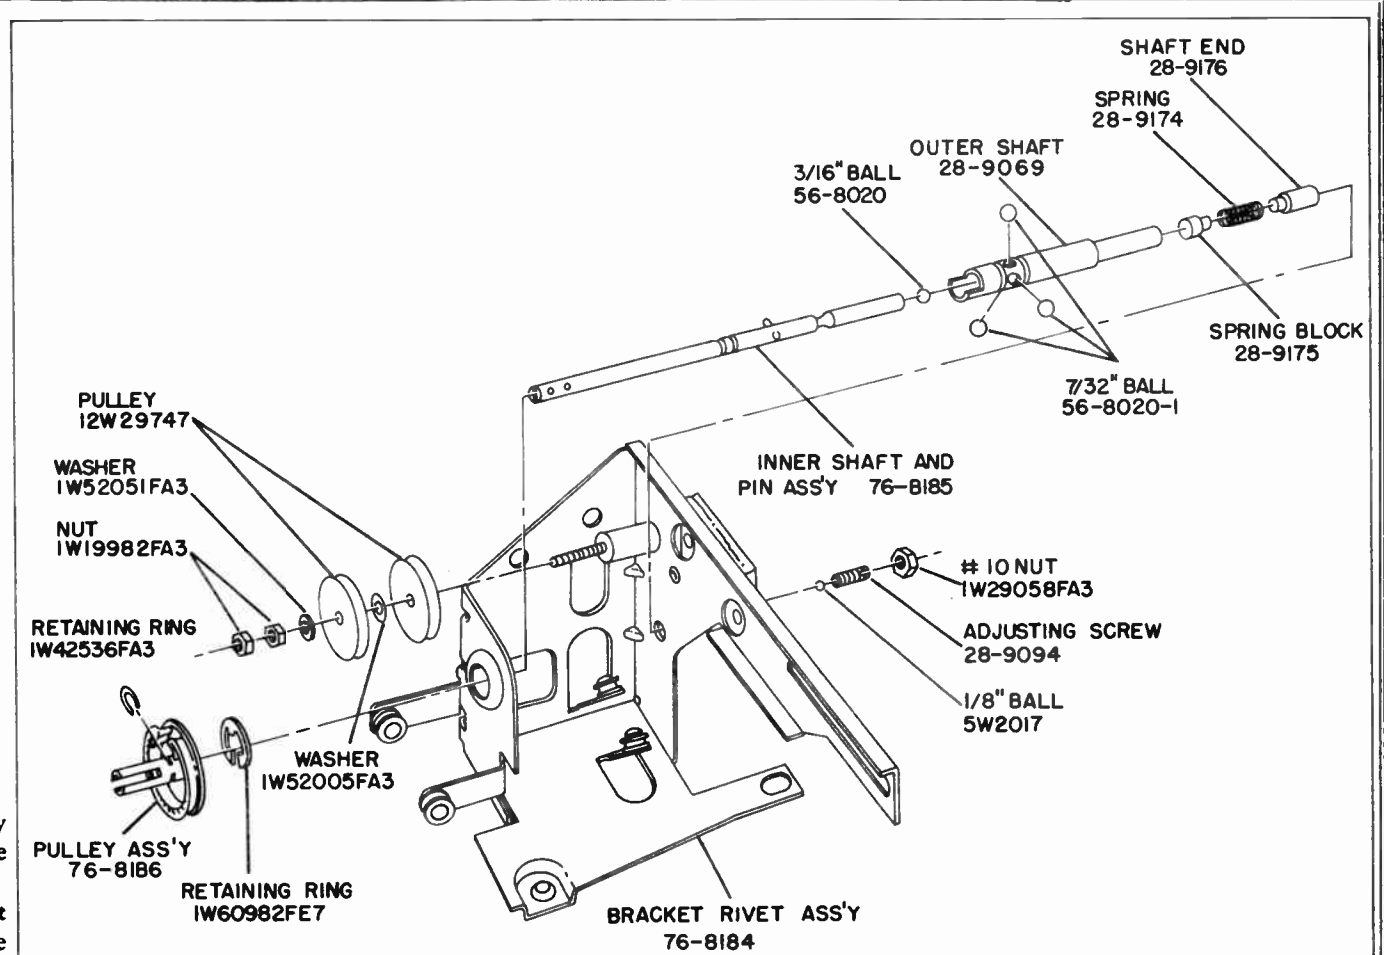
Planetary Assembly, Exploded View, Showing Mechanical Layout (Both Tuner-Adapters)
